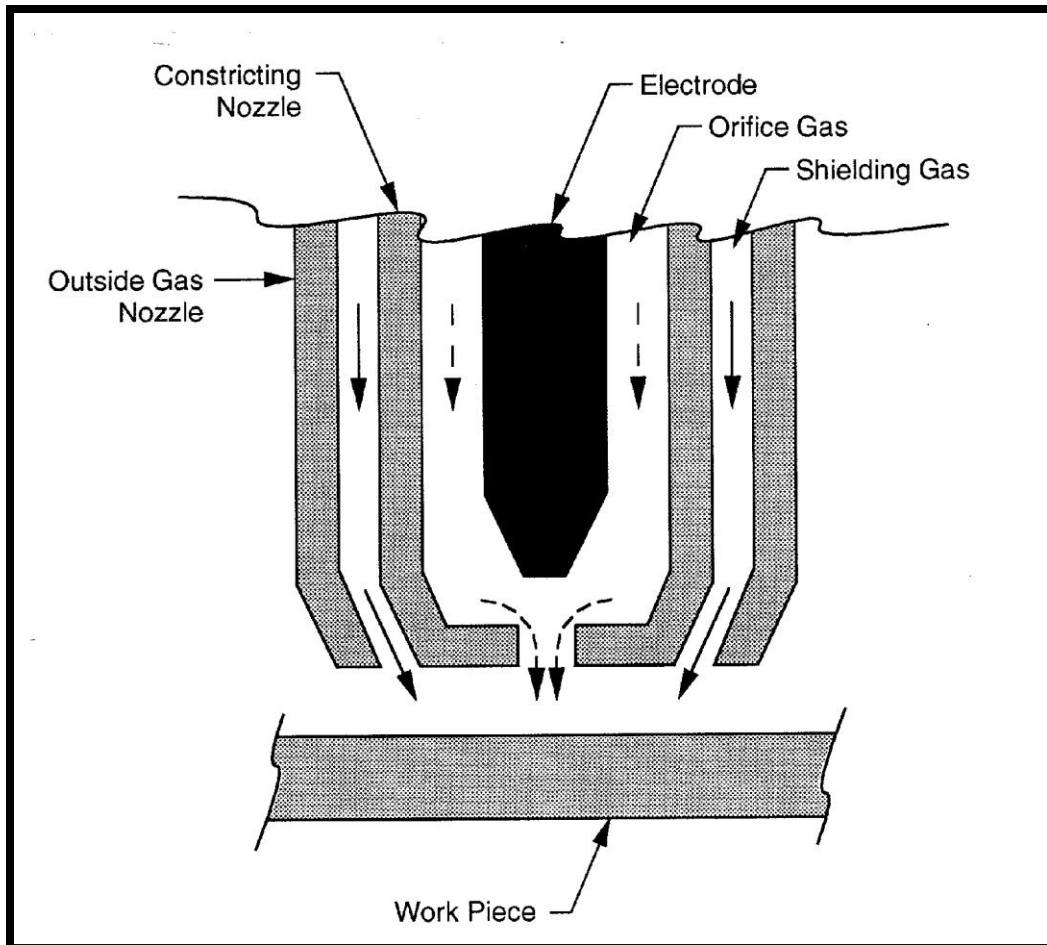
VPPA Welding – EPA AP-42 (Henning)
